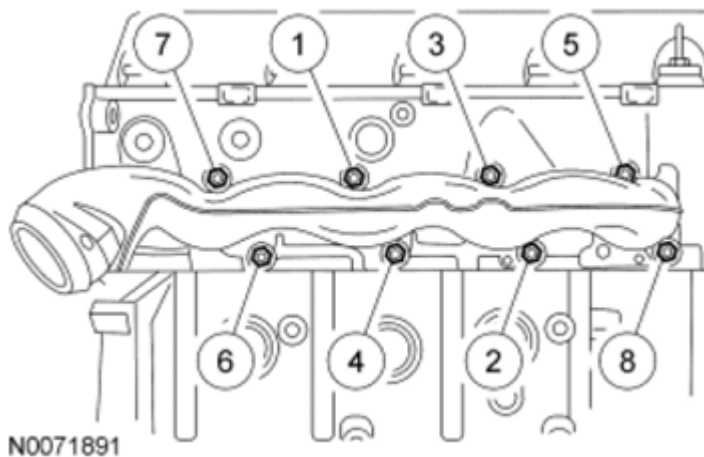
Identifying Exhaust Manifold Gasket And Exhaust Manifold Nuts Tightening Sequence
